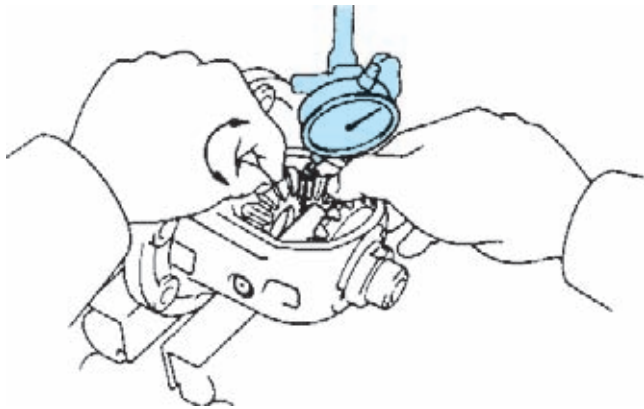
Differential wear can be checked by measuring the side gear backlash using a dial indicator. (Courtesy of Toyota Motor Sales USA, Inc.)
